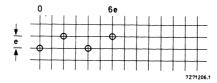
Recommended hole pattern for mounting on a printed-wiring board; e=2,54 mm. The tolerance on the distances of the different holes to the 0-line is \pm 0,1 mm. Hole diameter is 1,0 + 0,1 mm.
